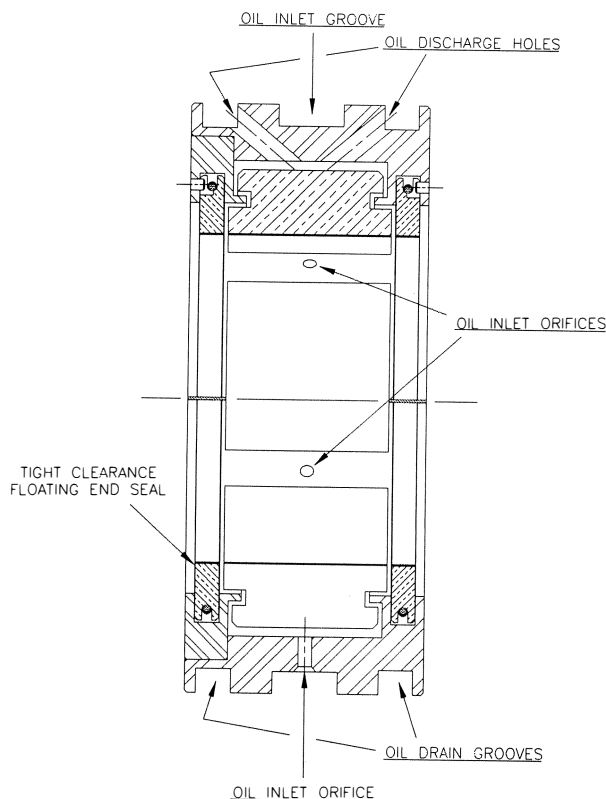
Non-Pressurized Housing Tilt Pad Bearing Design.
